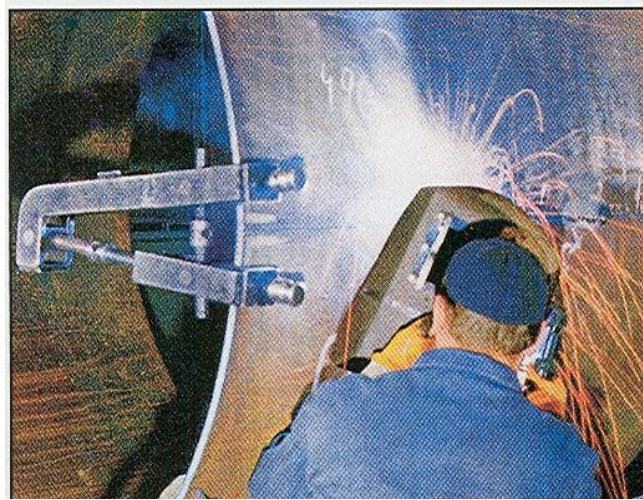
Mechanical Jig for clamping / adjusting the sheet's ends
